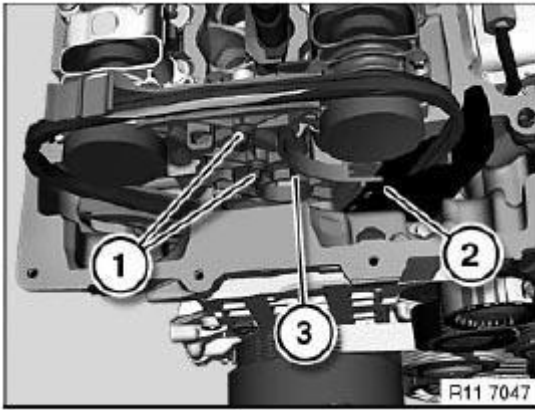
Identifying Timing Chain Module, Junction And Screws
